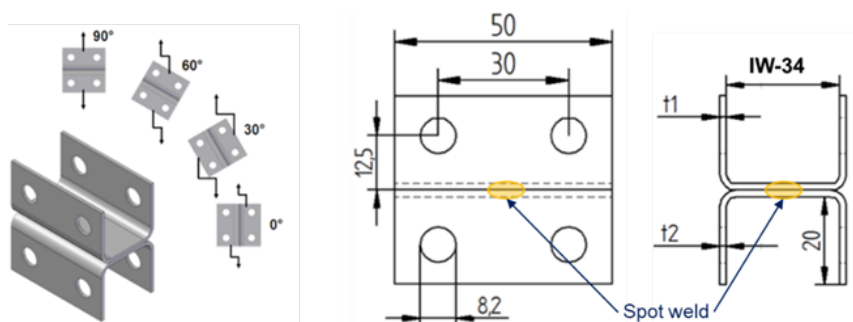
Load bearings (left) and (right) geometry of the used LWF-KSII specimen
